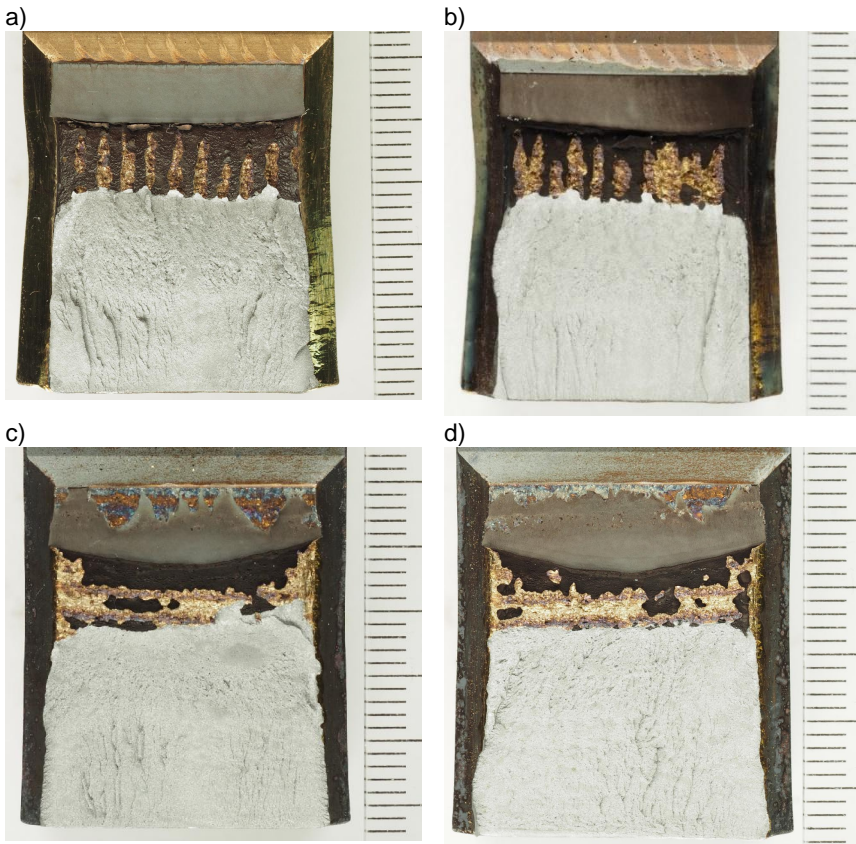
Photographs of fracture surfaces of the J-R test specimens, tested in 5000 h aged condition in T-L orientation, a and b, and T-S orientation, in c and d. Crack initiates in LAS, after which it deflects to the weld metal side and occasionally back to LAS side
